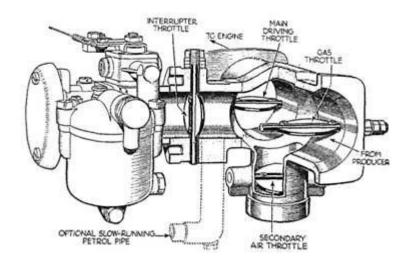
THE SOLEX GAS-PETROL CARBURETTOR
